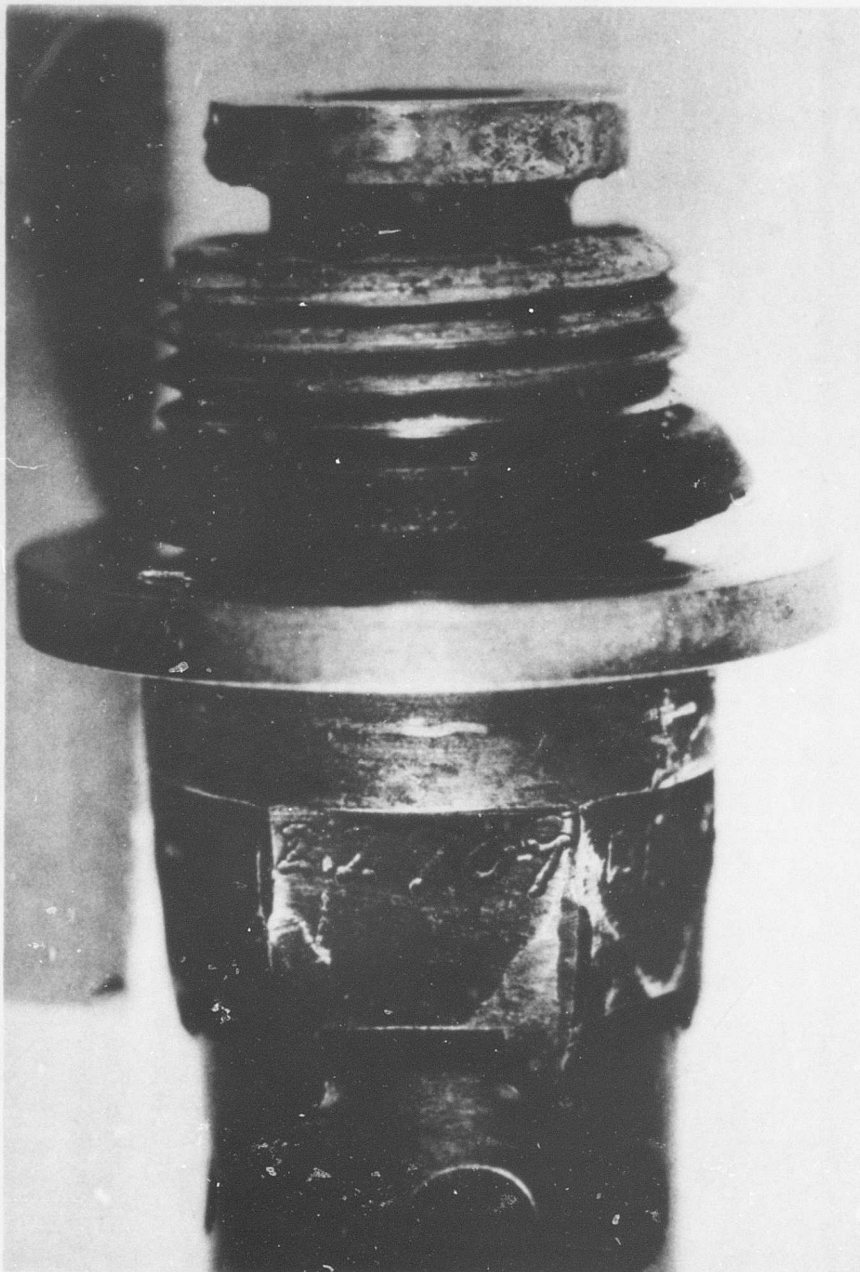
Fuel Nozzle After Engine Test Showing Deposits on Inlet End; Close-Up View. Magnification: 10X
